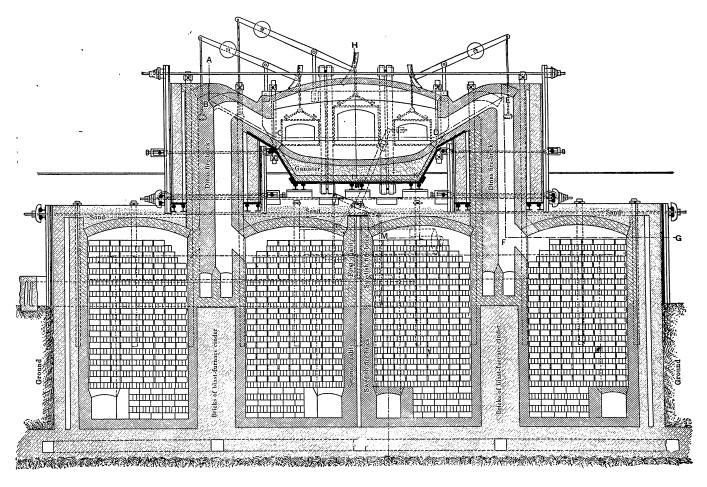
Open Hearth Furnace.-Section O P Q R.
